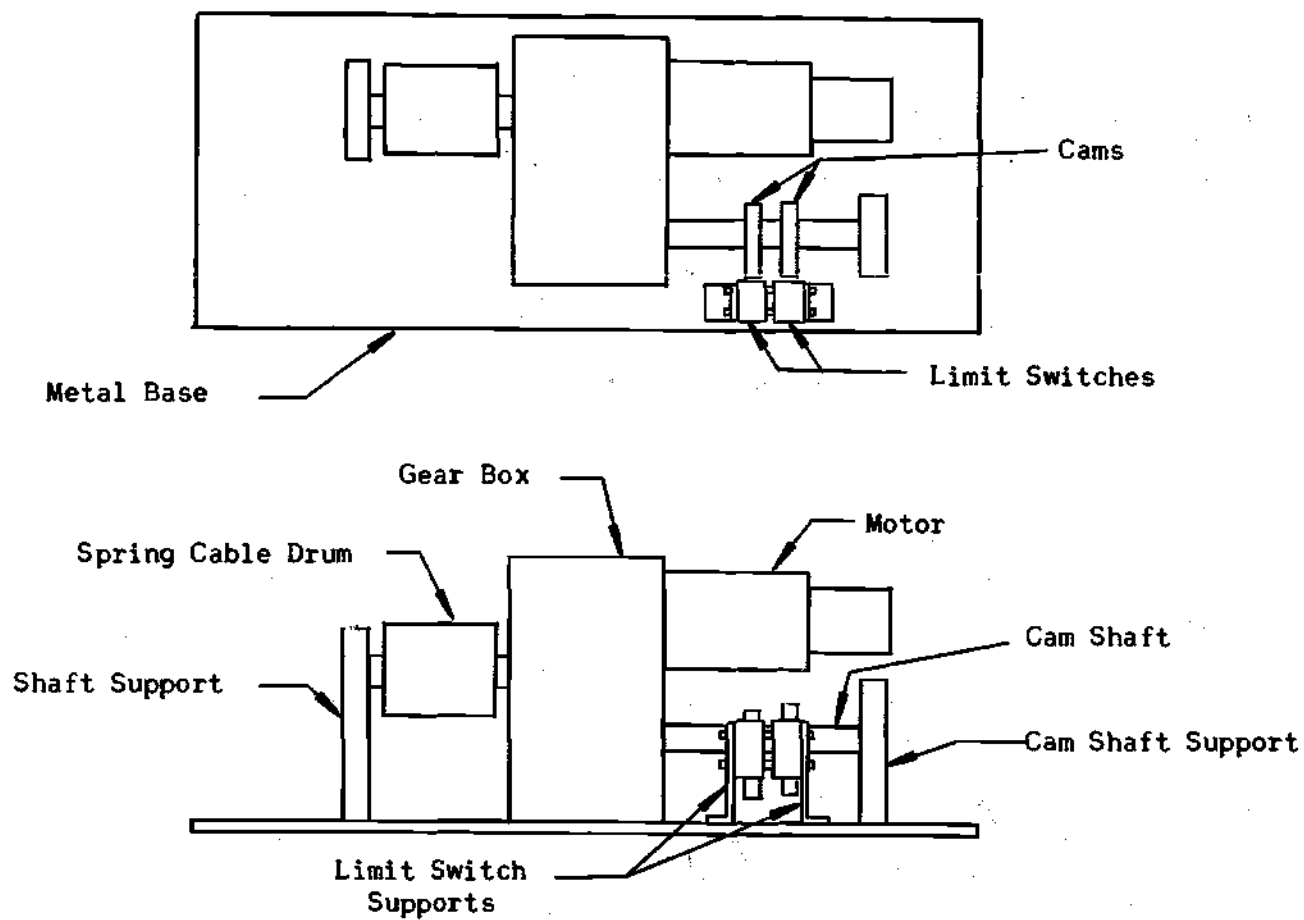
Control Motor, Gear Box, and Limit Switch Arrangement.
